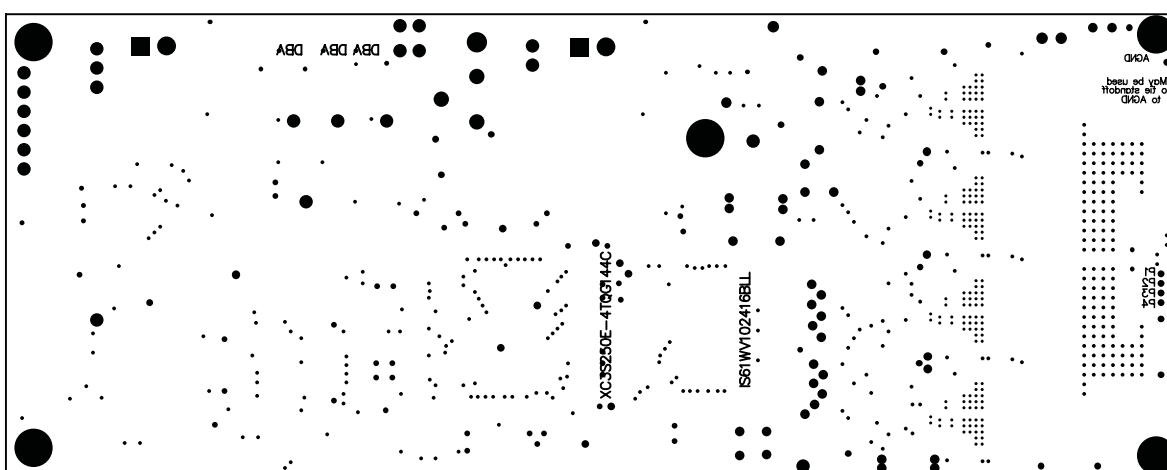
Bottom Silkscreen for DDC264EVM DUT Board
